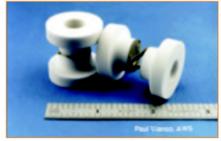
ASTM-F19 tensile button. (Previously published in Titanium Scavenging in Ag-Cu-Ti Active Braze Joints, by P. T. Vianco, et al., October 2003 Welding Journal.)
